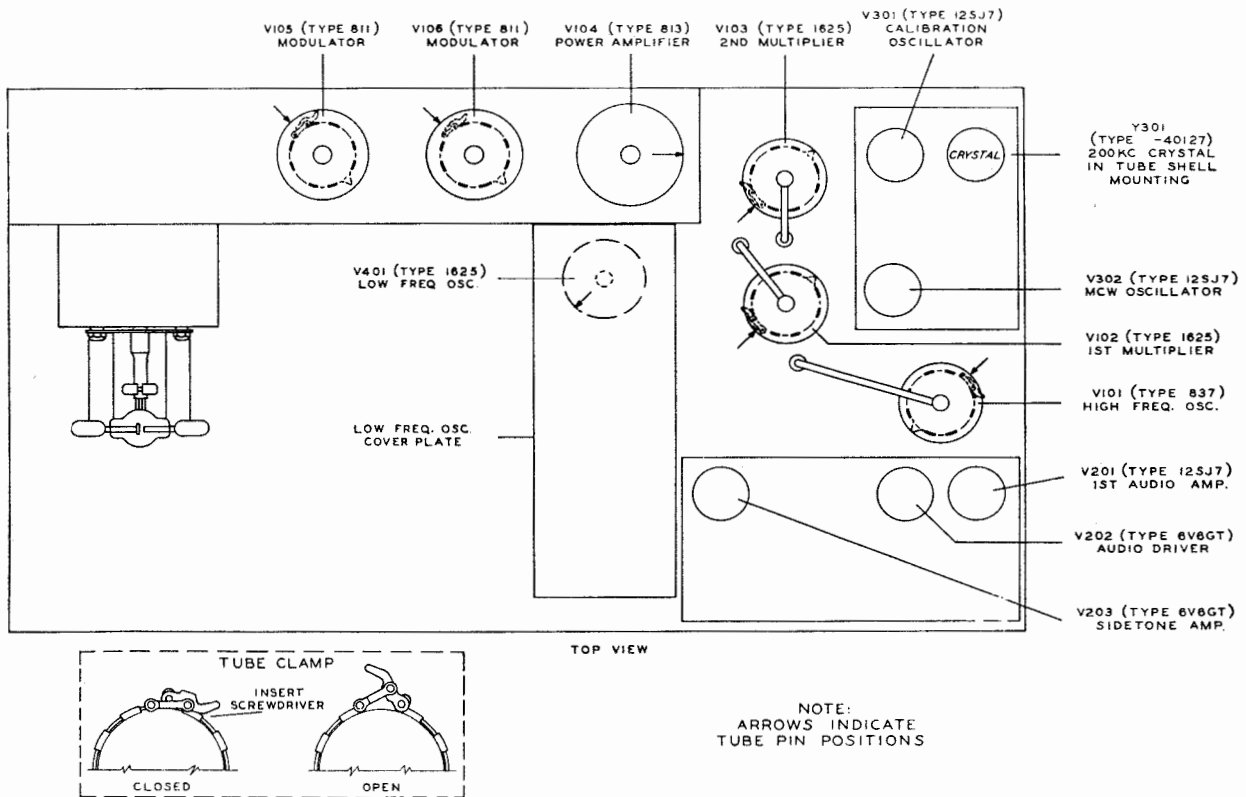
Tube Placement Diagram (Dwg. No. K1627B)
